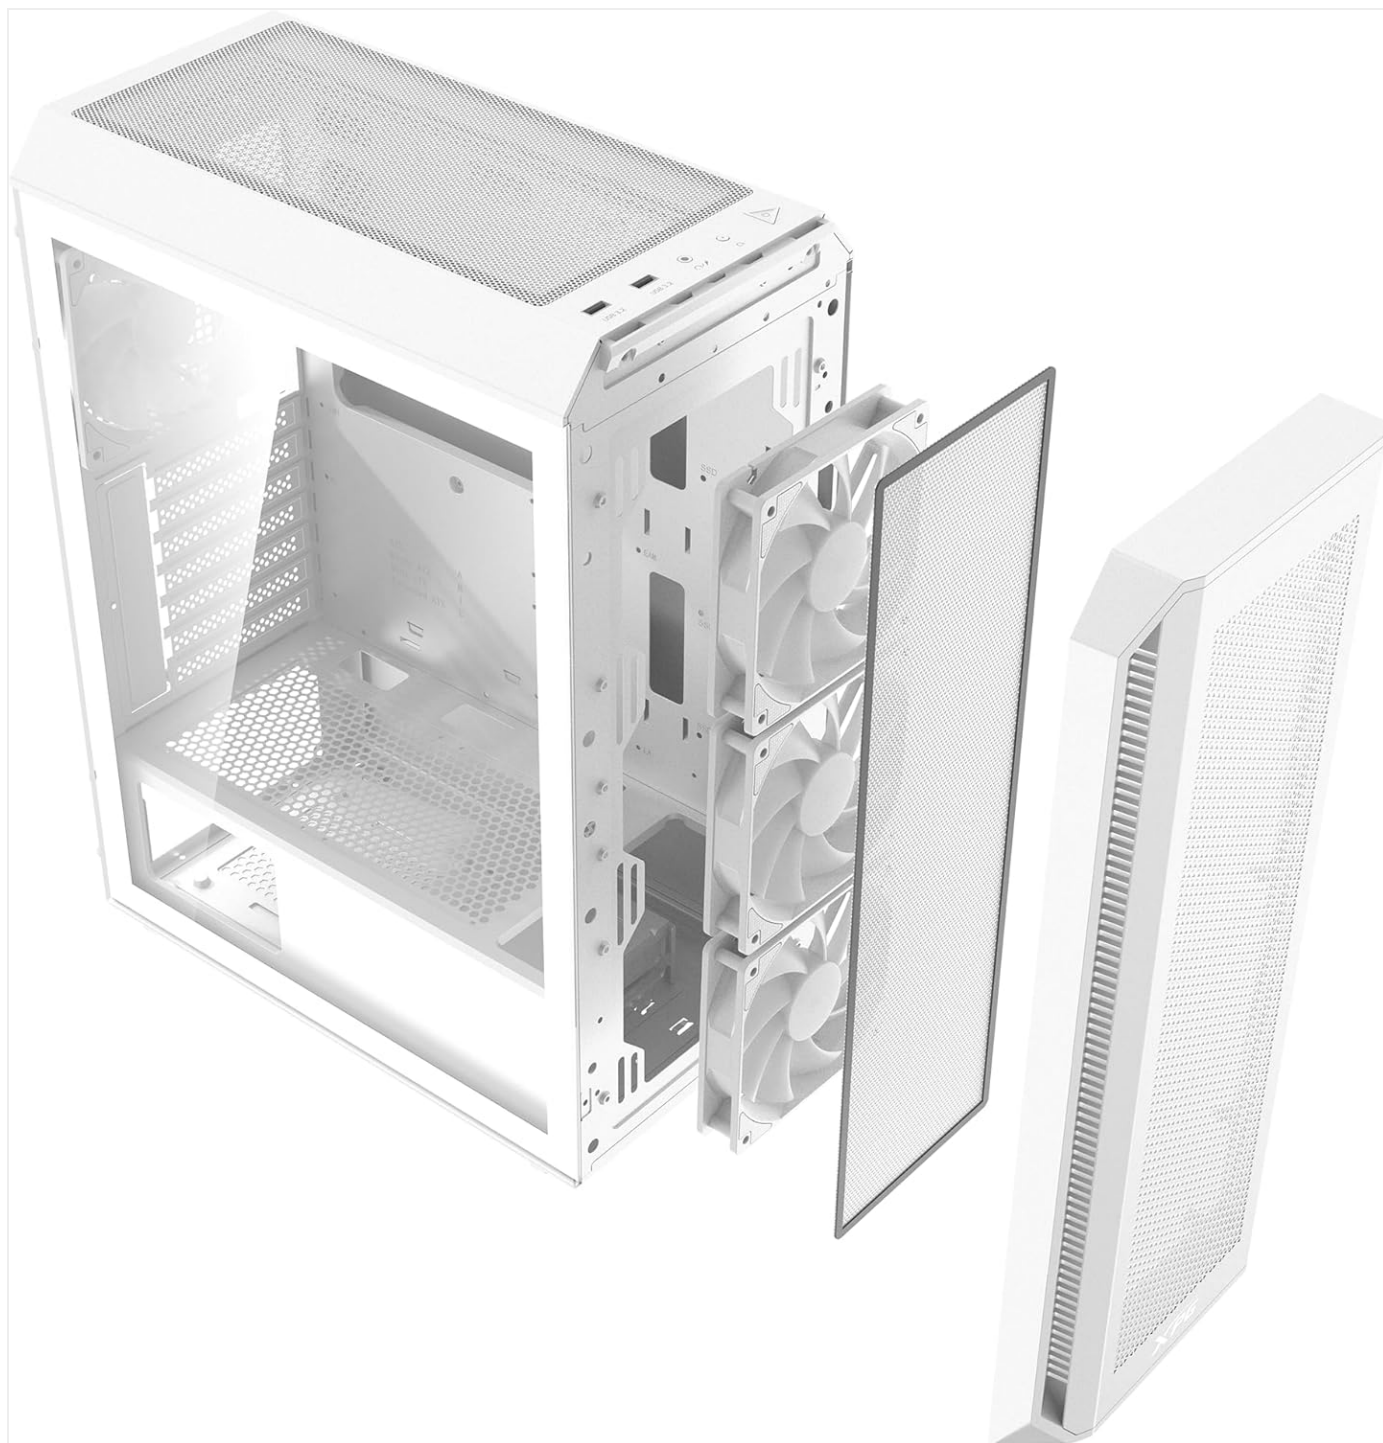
Exploded view demonstrating removable panels and dust filters for easy access and maintenance.
